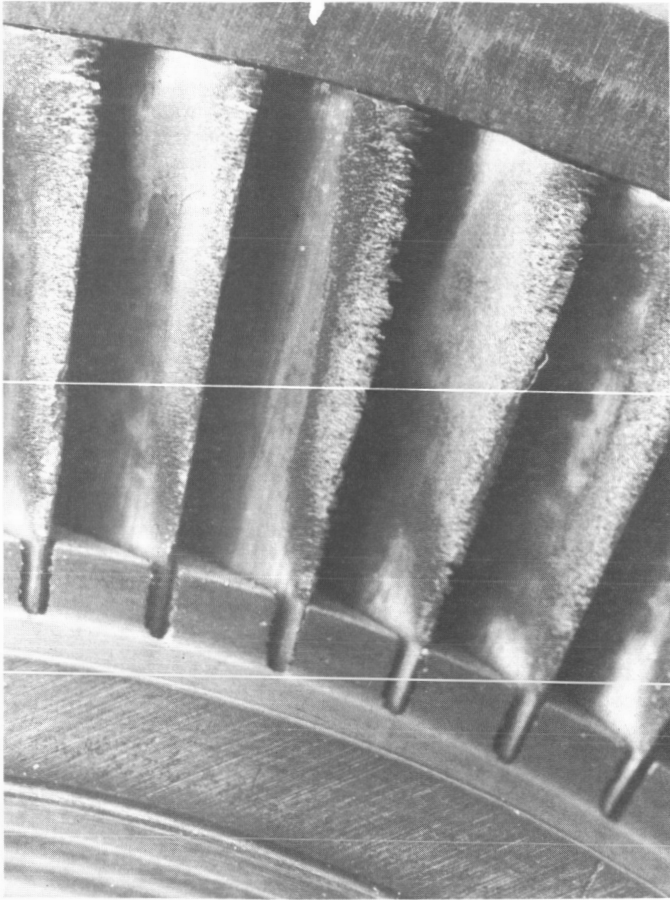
Third-stage turbine wheel, inlet; Sunflower CRU 1-3 after 2344 hours
